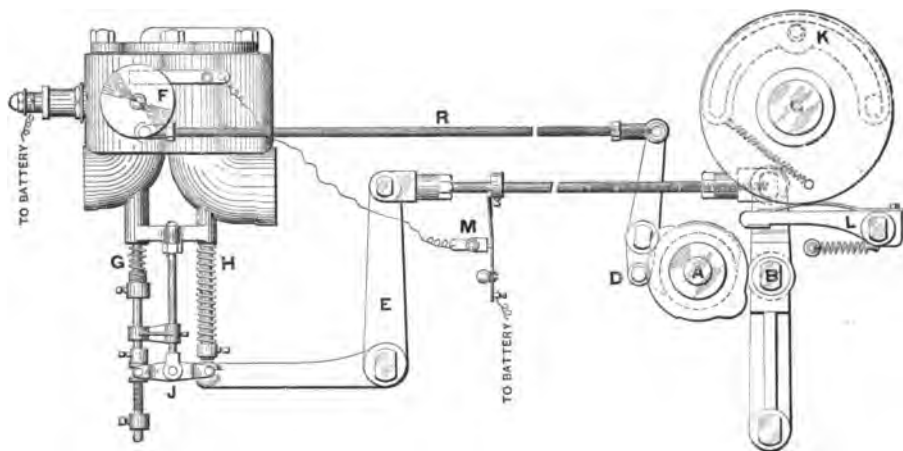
VALVE GEAR OF THE UNION ENGINE.
